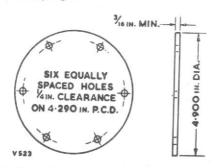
Blanks for accessory mounting faces (48 Mk. I)
